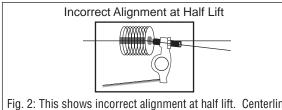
This shows incorrect alignment at half lift. Centerline of the adjusting screw is below centerline of valve stem. More rocker stud shims are necessary.
